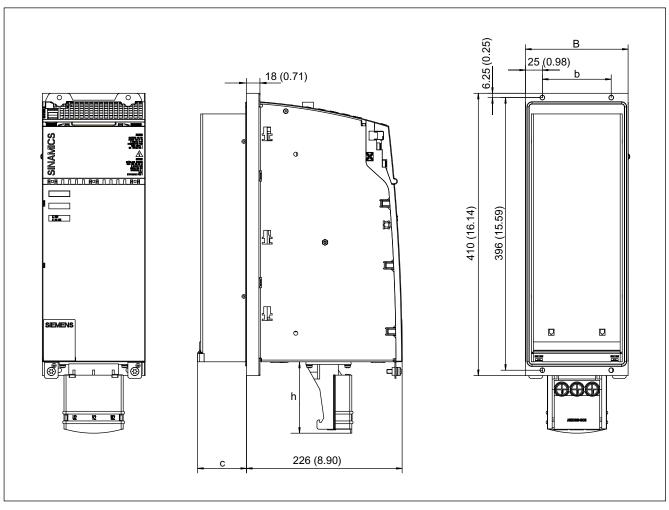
Dimension drawing of 45 A, 60 A, and 85 A Motor Modules Booksize with external air cooling, all dimensions in mm and (inches)
